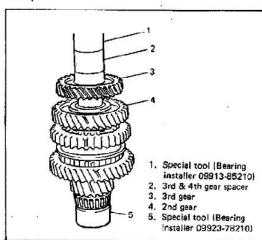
A-59 Press-fitting 3rd Gear and Spacer
